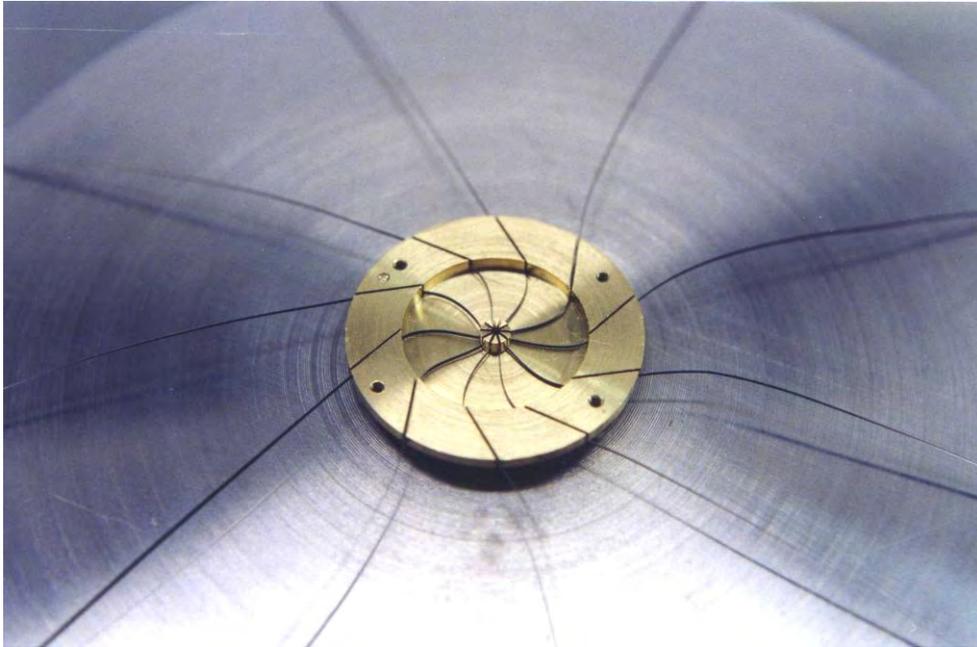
Wires placed in the mold and attached to a center winding arbor.
